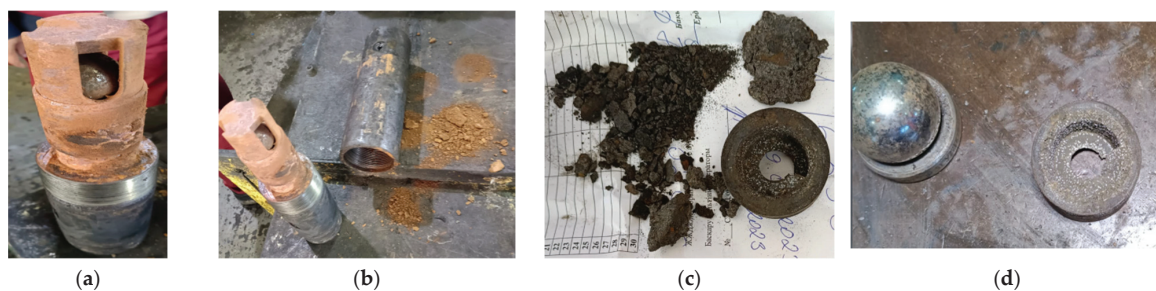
The condition of the turbulizer and valve components after retrieval of the pump from well No. 6356 (operation time is 39 days). (a) The general view of the valve assembly with the removed turbulizer showing mechanical damage. (b) Close-up of the turbulizer surface with traces of abrasive wear on the screw plate. (c) The inner surface of the turbulizer illustrates thinning and edge erosion caused by solid particles. (d) Accumulated deposits and contamination in the valve seat area.
